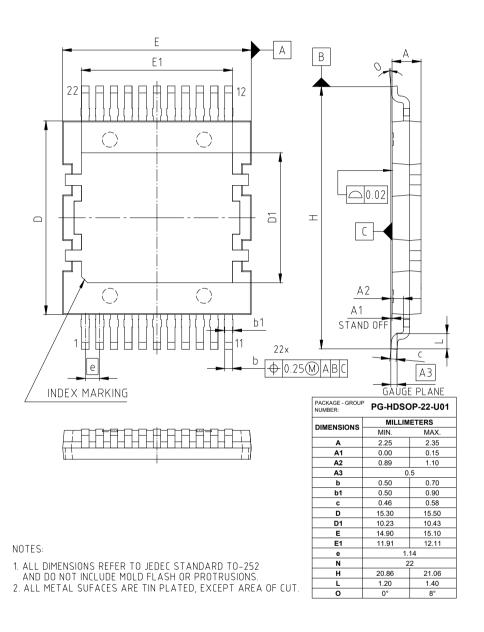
Outline PG-HDSOP-22, dimensions in mm
